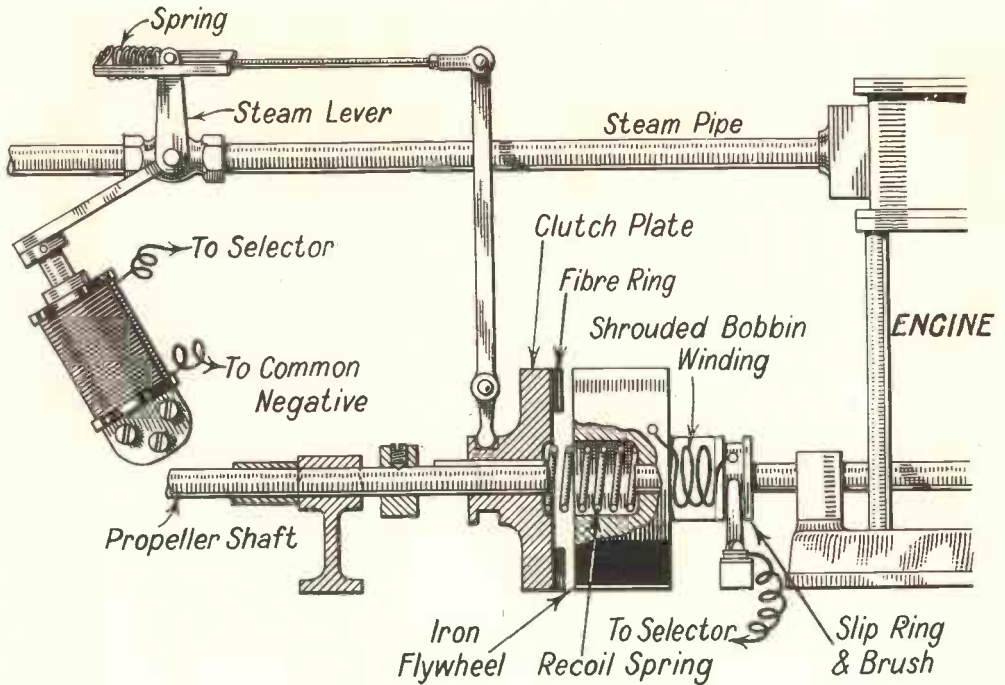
DETAILS OF MAGNETIC CLUTCH.
